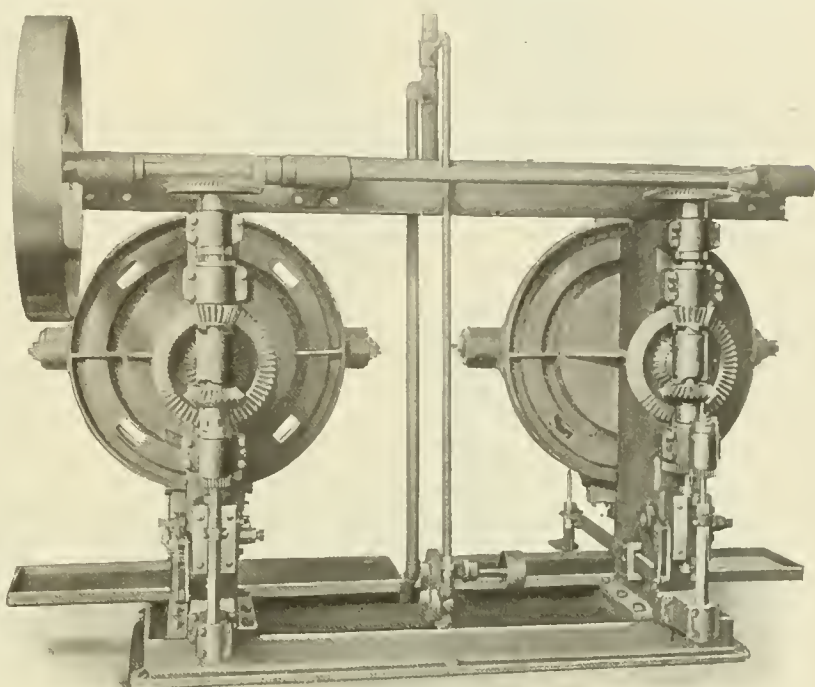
Rear View of Tapping Machine, showing the Driving and Automatic Reverse Mechanism
